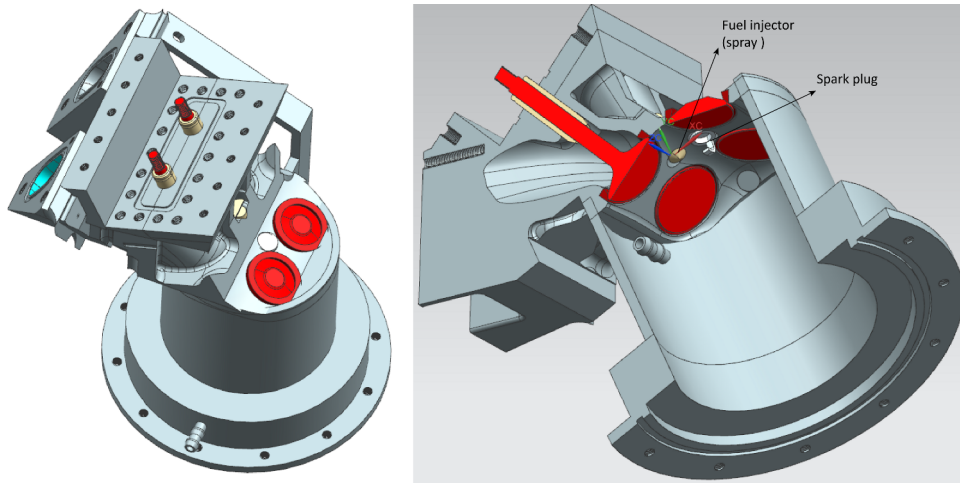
Model of the engine and its cross-sectional view in the mid-valve plane
